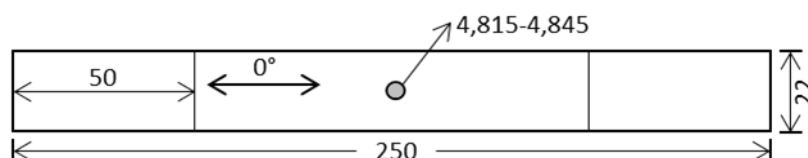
Coupon geometry for filled hole tensile test, according to AITM 1-0007. All dimensions are expressed in mm.
